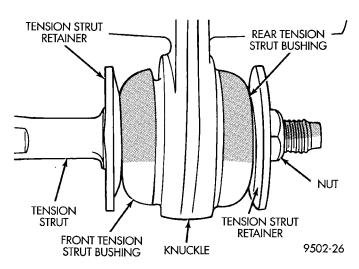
Tension Strut Bushings Installed On Tension Strut
